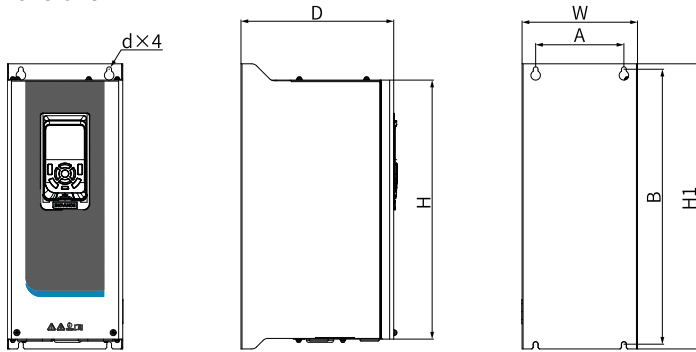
Outline dimensions and mounting dimensions of S4 models
